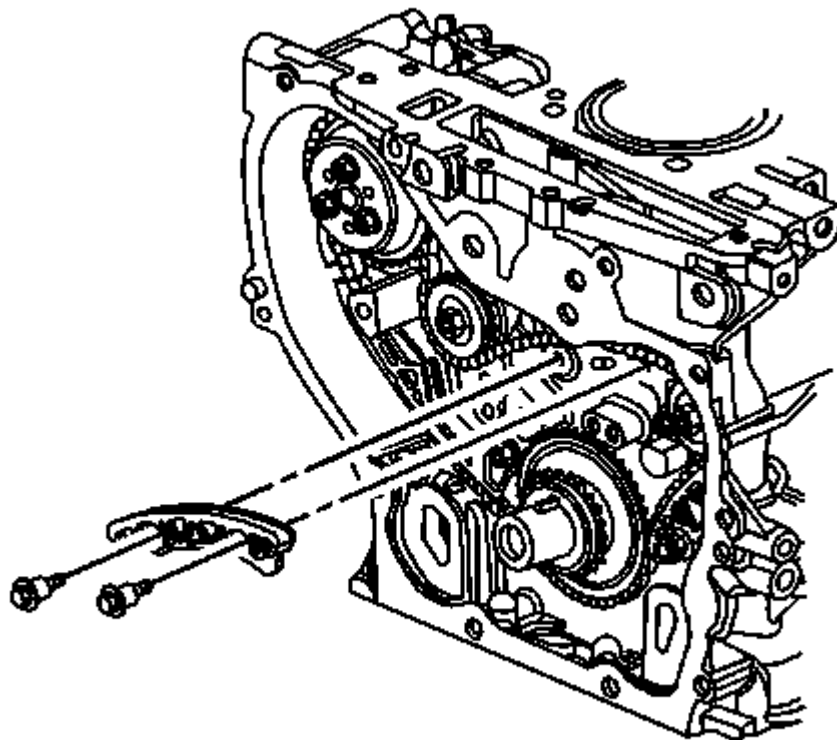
Identifying Upper Balance Shaft Drive Chain Guide
